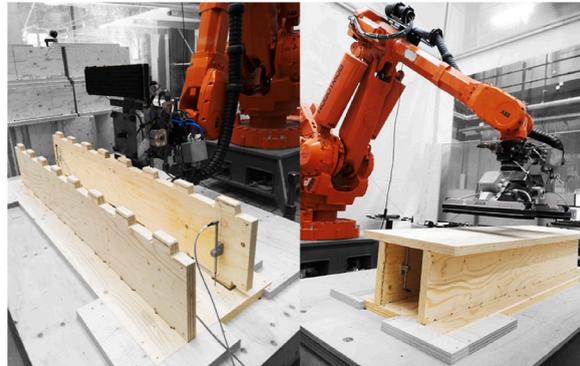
Robotic assembly of a box girder with through-tenon joints [49].
